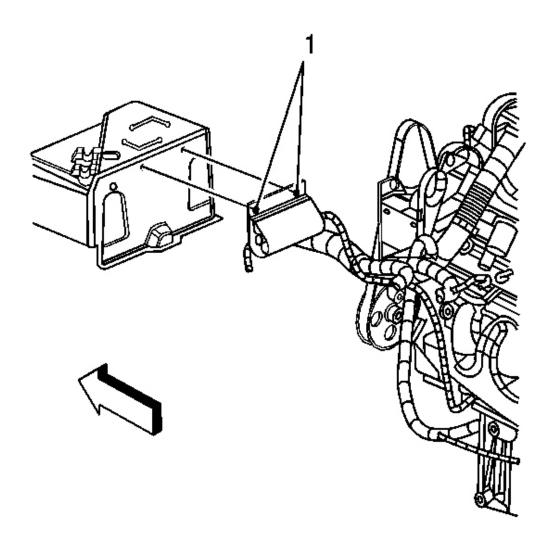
View Of Coolant Heater Cord Retainers Courtesy of GENERAL MOTORS CORP.
